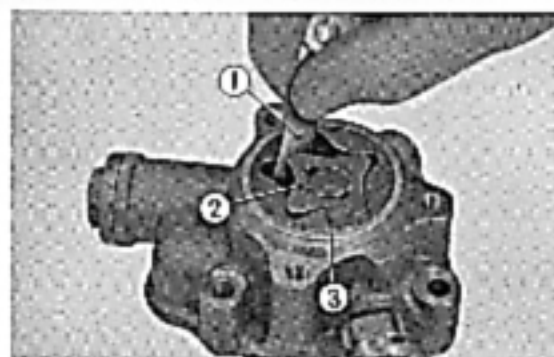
① Feeler gauge ② Inner rotor ③ Outer rotor
